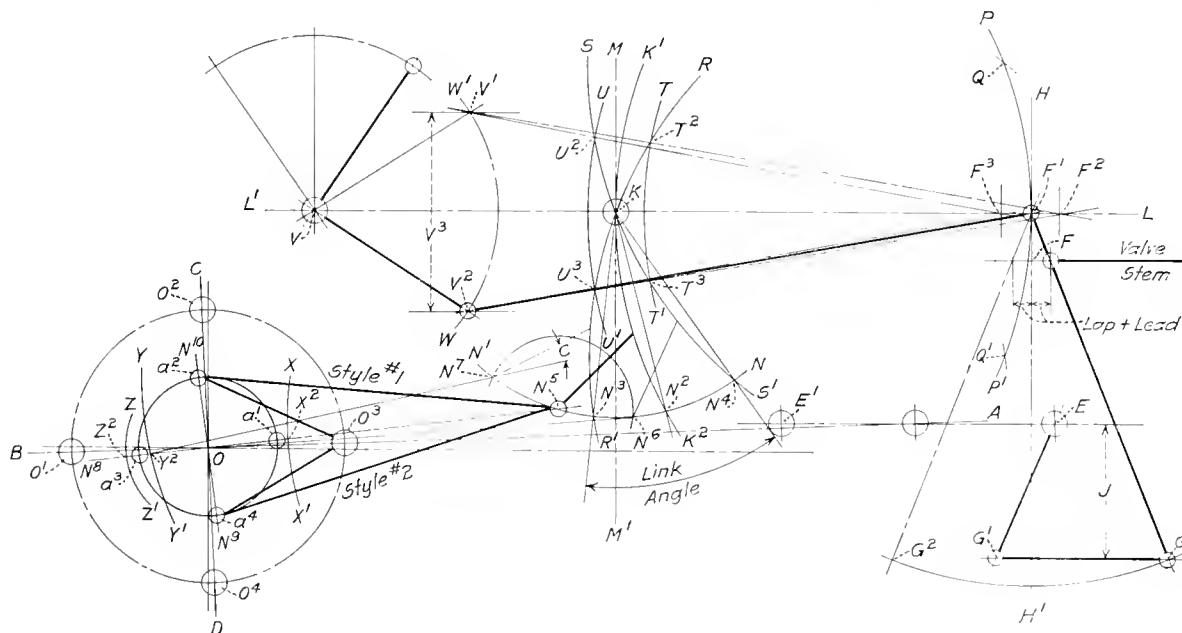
Layout of Walschaert Valve Gear for Inside Admission Valves
